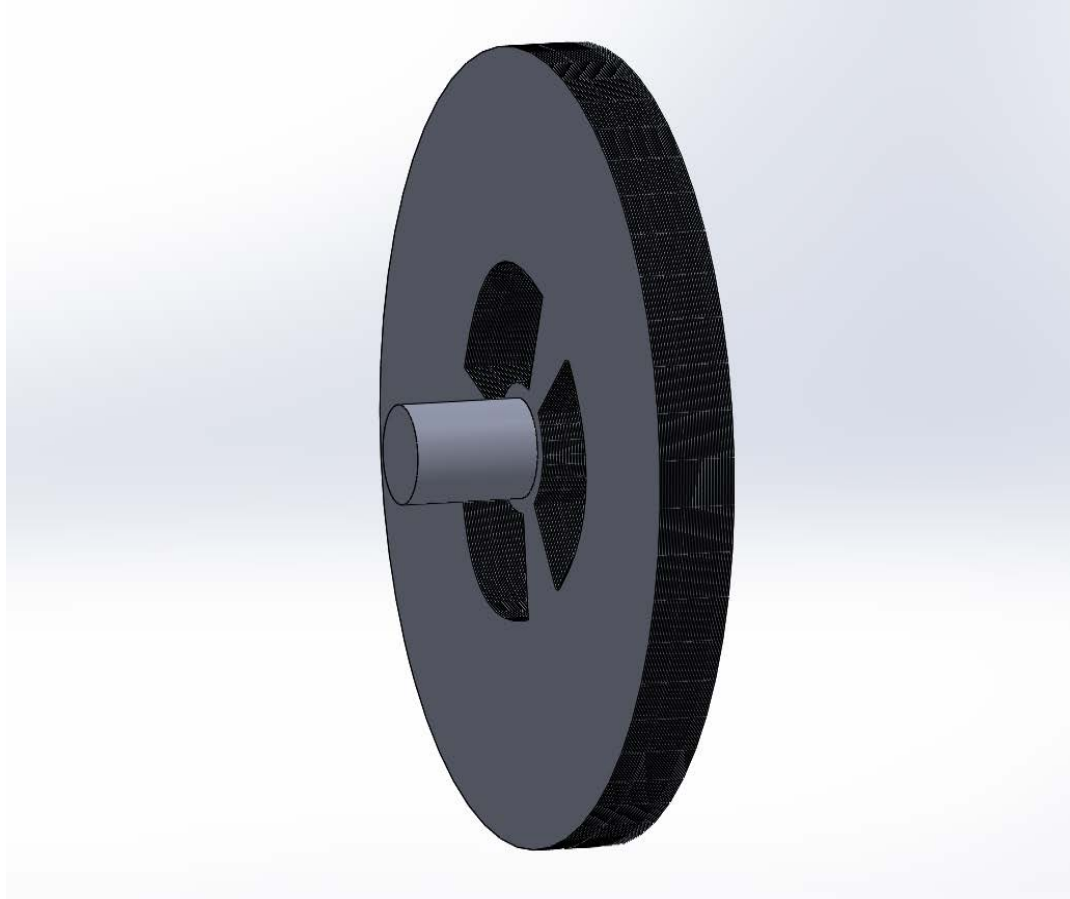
Rotor assembly with closely packed disks attached to shaft
